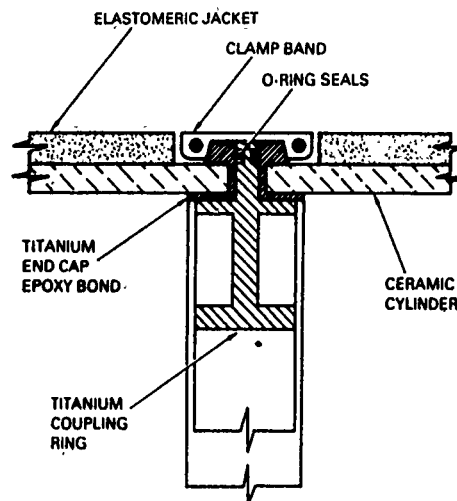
Mechanical Joint Developed by NOSC For (1) Alignment, (2) Radial Support, and (3) Clamping of *Adjacent Ceramic Cylinders* in the 12-Inch OD Housing.
